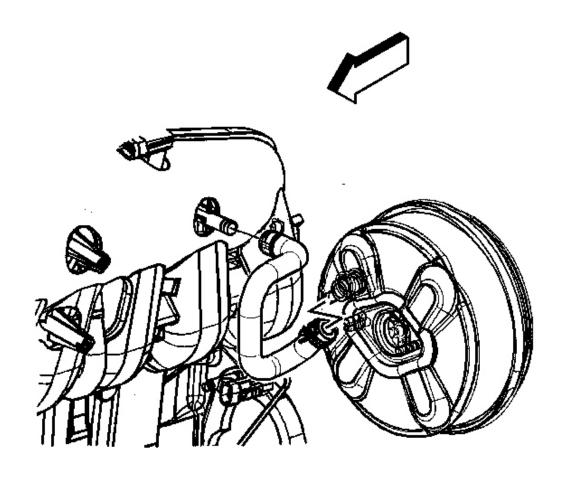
Vacuum Hose From Vacuum Booster And Engine Courtesy of GENERAL MOTORS CORP.
